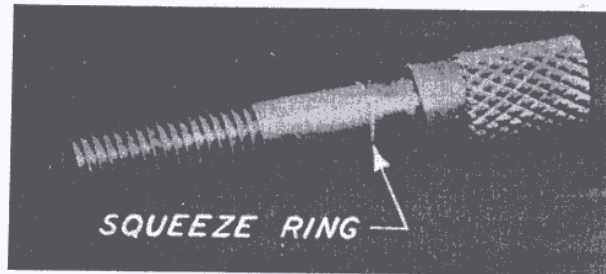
Squeeze ring near center of insert is crushed to form a tight seal when the insert is driven into the mold pin. This prevents flash from flowing past the ring and into the thread. Ring also holds insert in mold member when loaded in upper half of mold.
